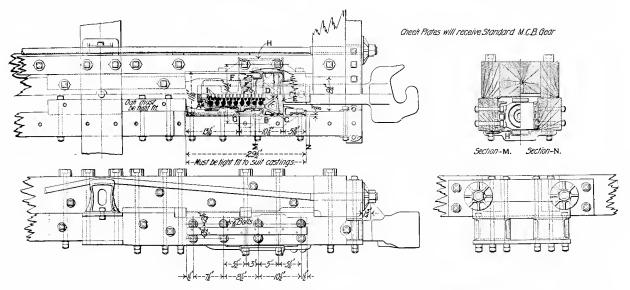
Sessions-Standard Friction Draft Gear, Type E, for Freight Cars with Wooden Center Sills.
